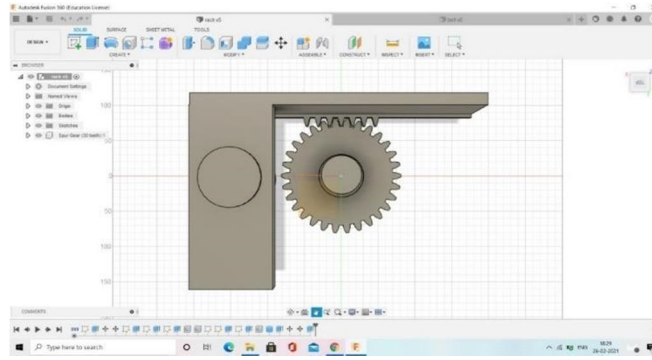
Design on fusion 360 for vary the distance by rack & Pinion gear (top view)
